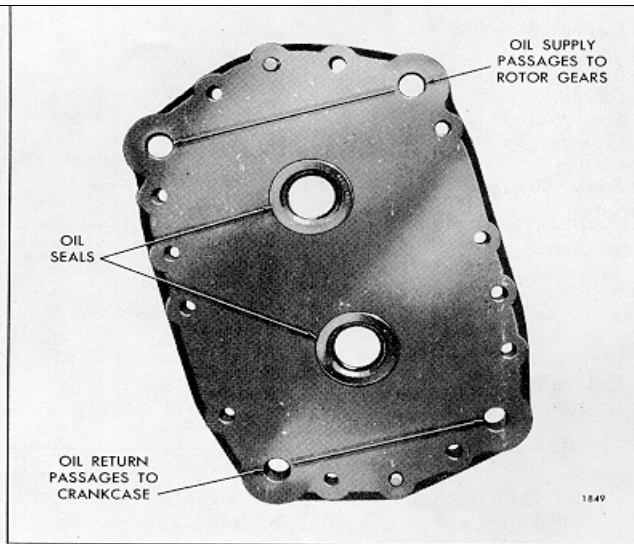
Blower End Plate and Oil Seal Location (Standard 71 and 71E Blowers)
